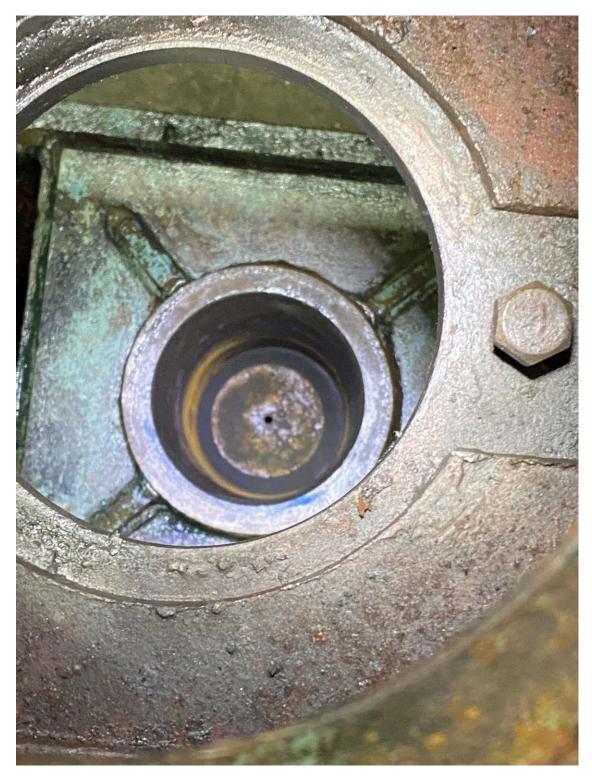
, Photo of upper and lower bull wheel axle bore (axle and sleeve removed). Looking through both the upper and lower horizontal hollow structure sections (*note, rust in lower bore) (note, the small hole in the lower bore did not provide a drainage feature).
